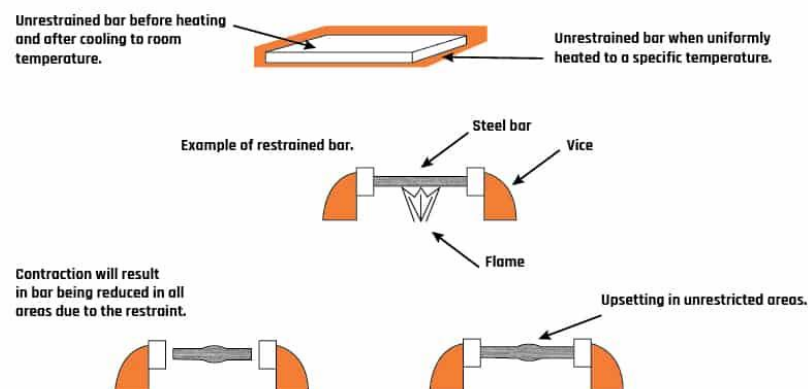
Shrinkage and contraction in welding [1]
